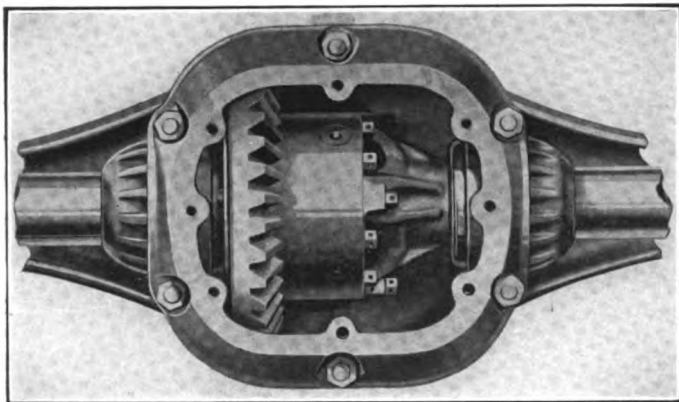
The Differential Housing with the Cover Plate Removed, Showing the Gear Assembly.
